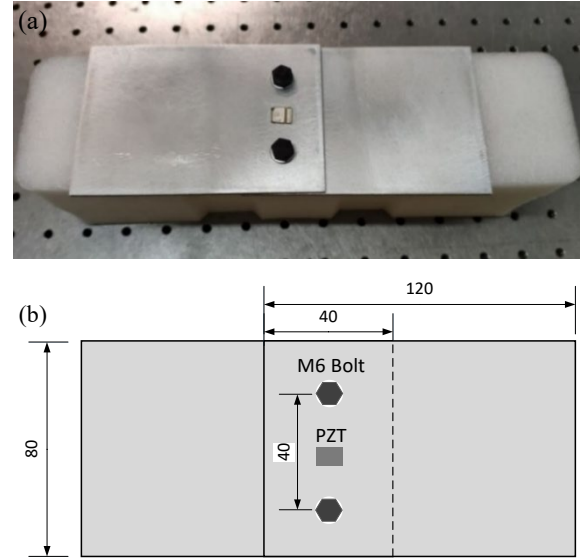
The bolted lap joint (a) Photo of the bolted lap joint, (b) Dimensions of the specimen (Unit: mm)
